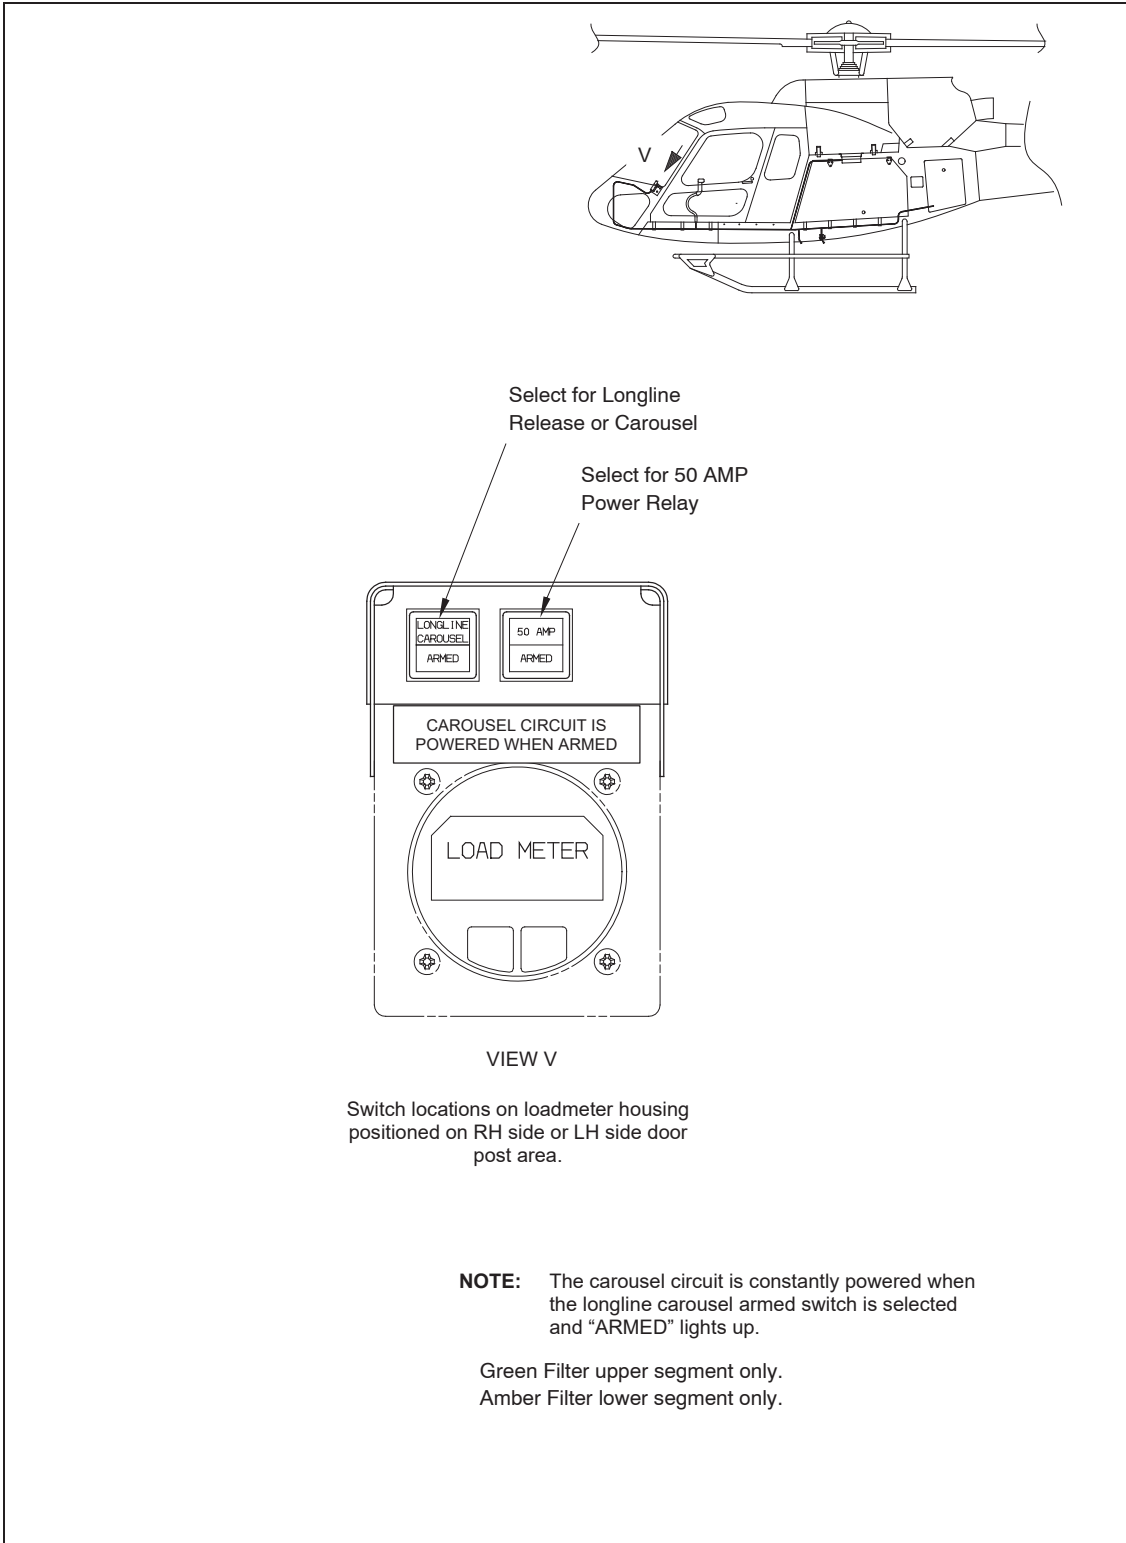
Switch Housing Assembly Installation with Carousel System Modification
